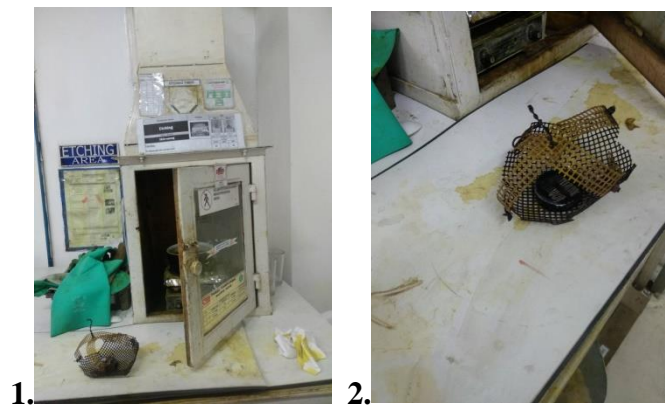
Etching Machine(1) and Plate of Nugget(2)
